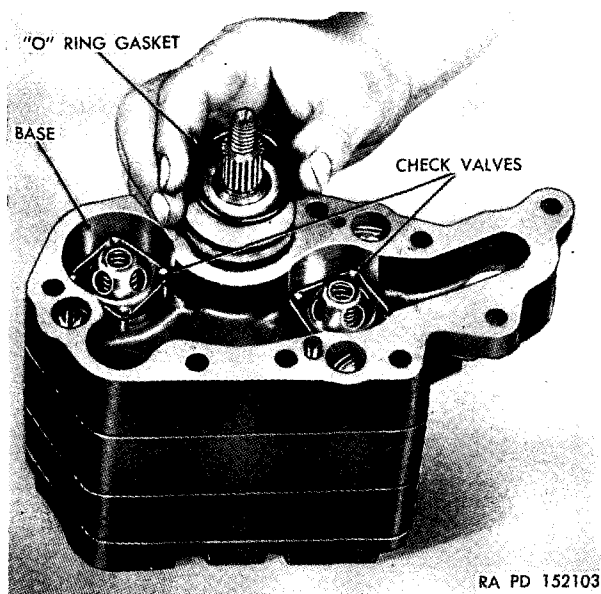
Removing or installing output-brake and pressure-pump "O" ring gasket.
